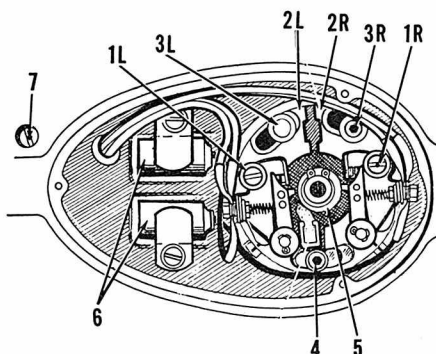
View of Mark 2T and 3T right side showing ignition timing points.
